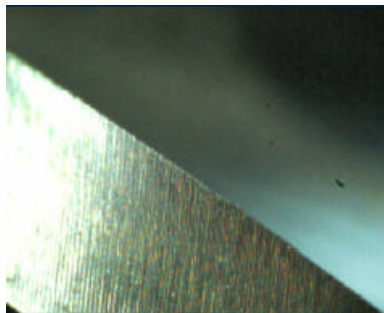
Test of a tool made from hard metal HB30F
